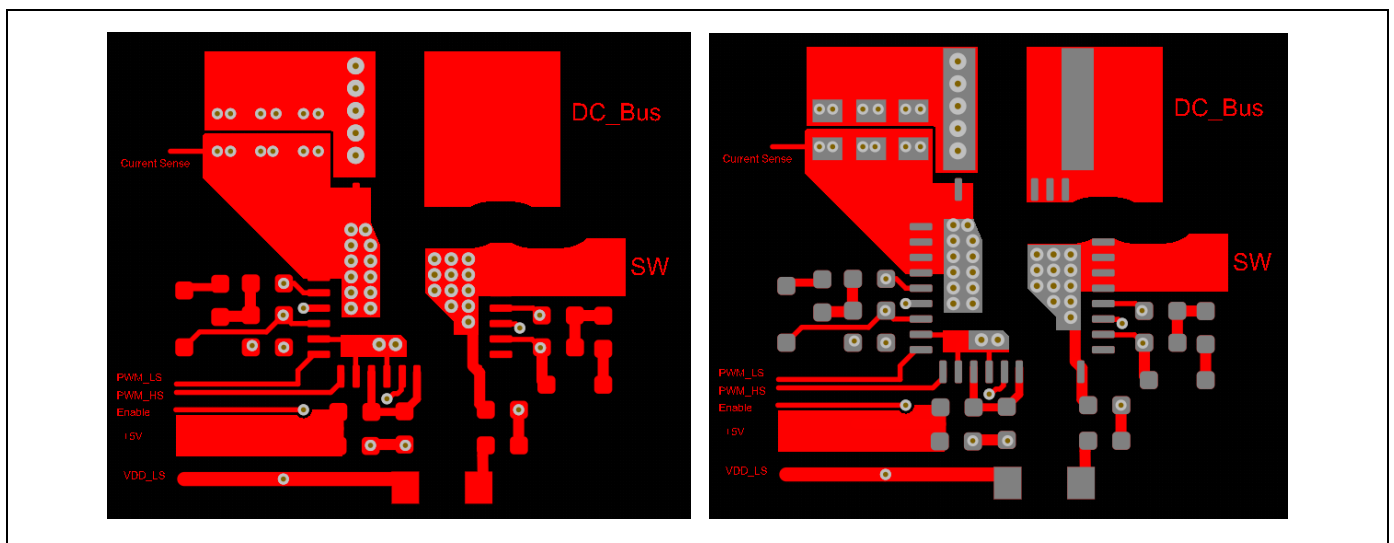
CoolGaN™ IPS external component placement on the PCB
